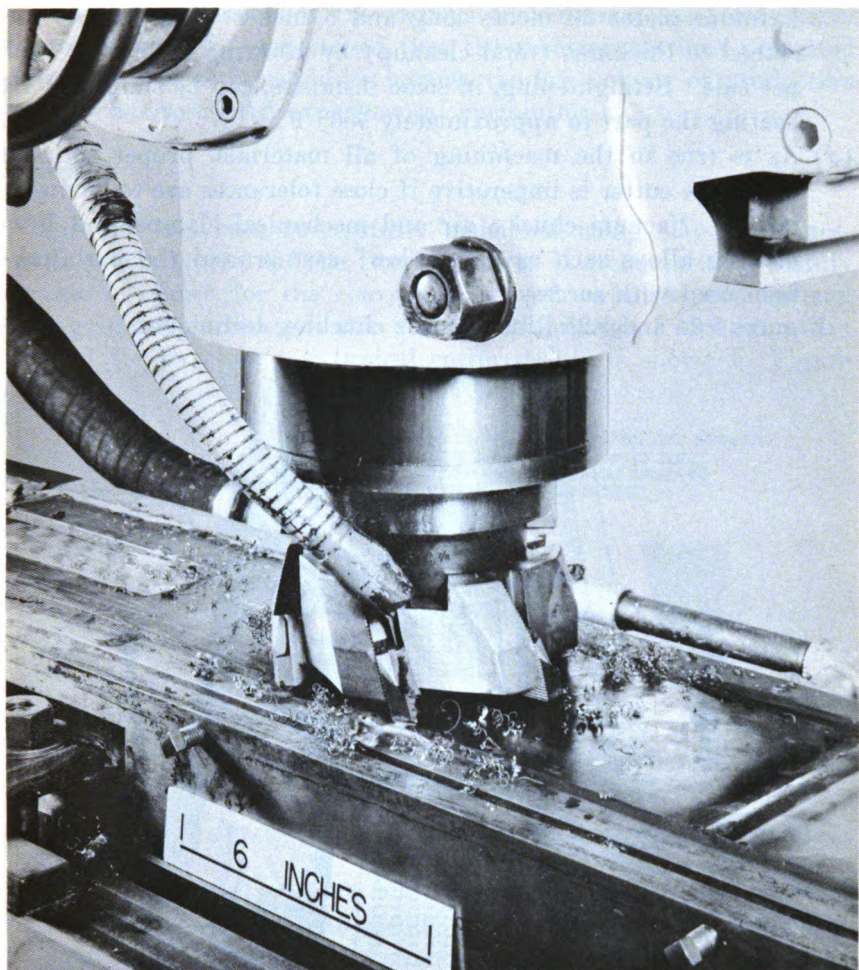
Milling Cutter and Plate Mounted on Vacuum Chuck.
